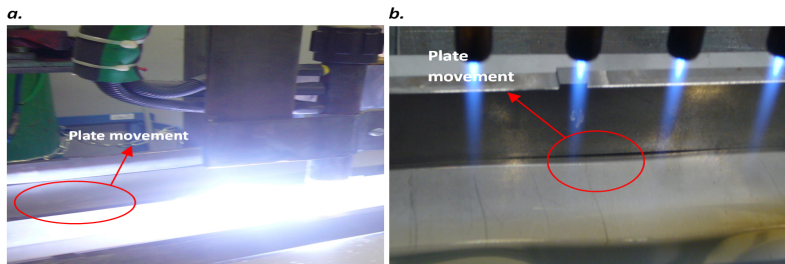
Plate deformation during welding and welding with additional heating by (a) the welding arc and (b) the additional heating burners.
